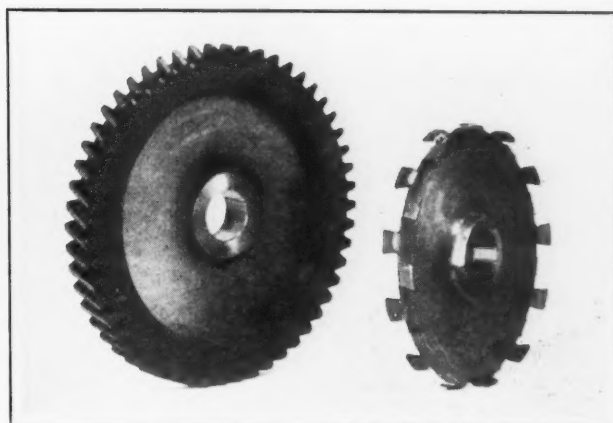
Improved Micarta Gear and Pressed-steel Web or Hub
